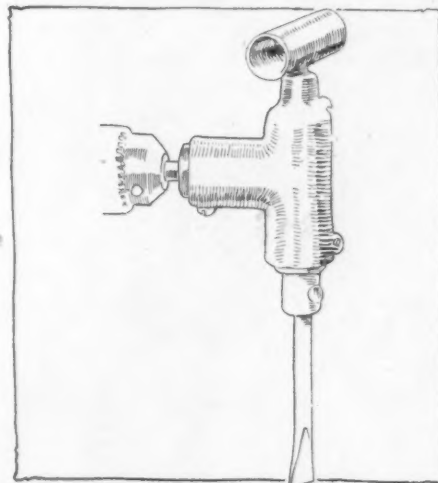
TEMCO ELECTRIC VALVE GRINDING TOOL
